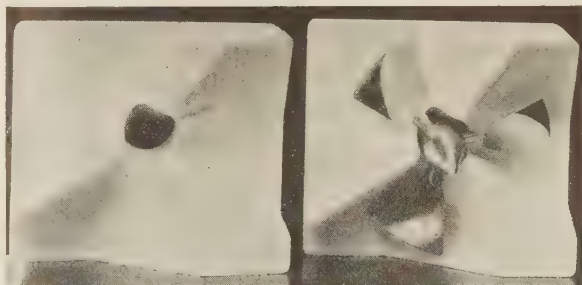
TYPE-1 PROPELLER WITH PLASTER MOLD
